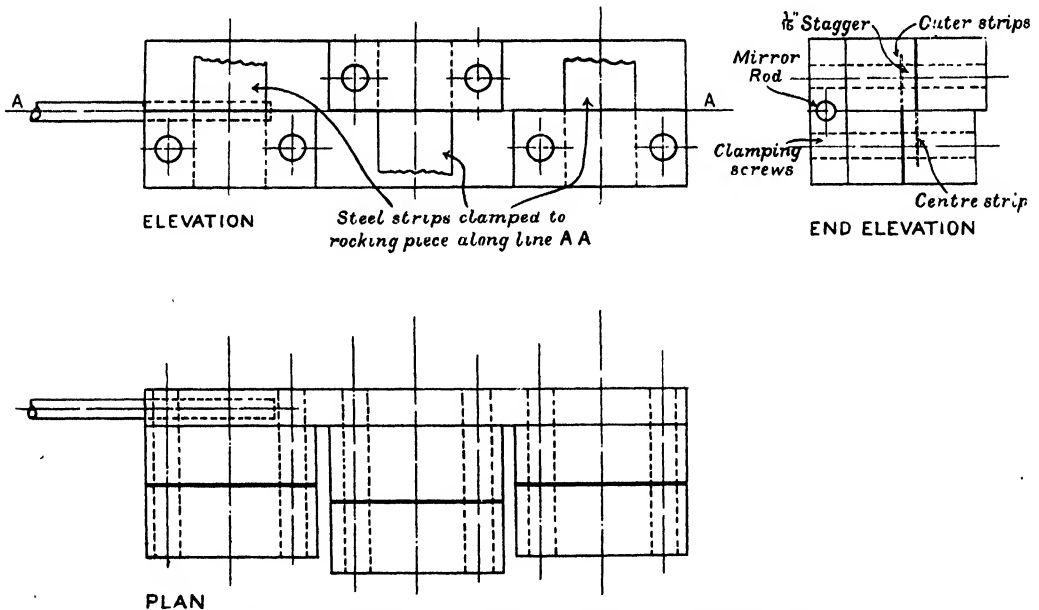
Extensometer, Type II. Detail of Rocking Piece
